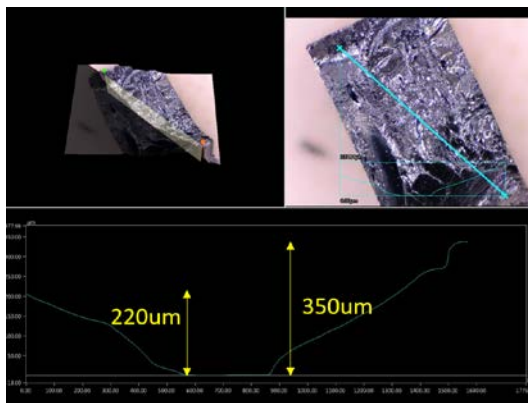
the cross section profile of the bond sample fractured during the shear test. The fracture (>100um) is much deeper than the thickness of the bond interface (~1um), and therefore the fracture is into the Si.
